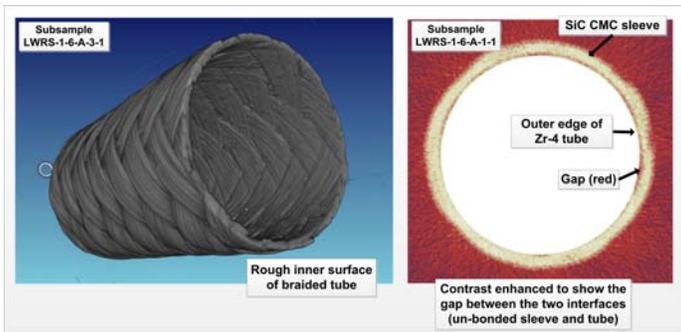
Three dimensional reconstruction of SiC CMC sleeve and fabricated hybrid tube geometry using 3D X-ray tomography techniques.
